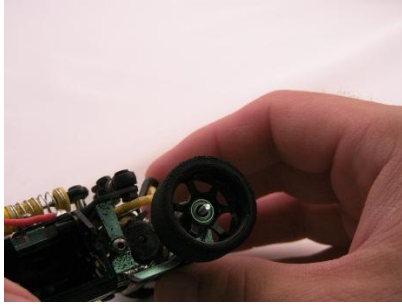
Install 3 x 6 x 2.5mm bearing/bushing
